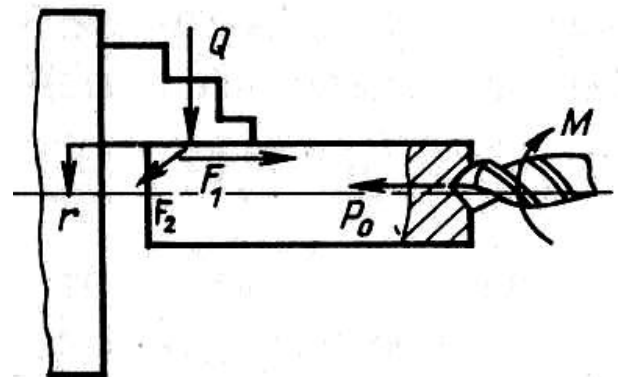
Diagram for calculation of clamping force when drilling hole in a round workpiece on a turning machine
